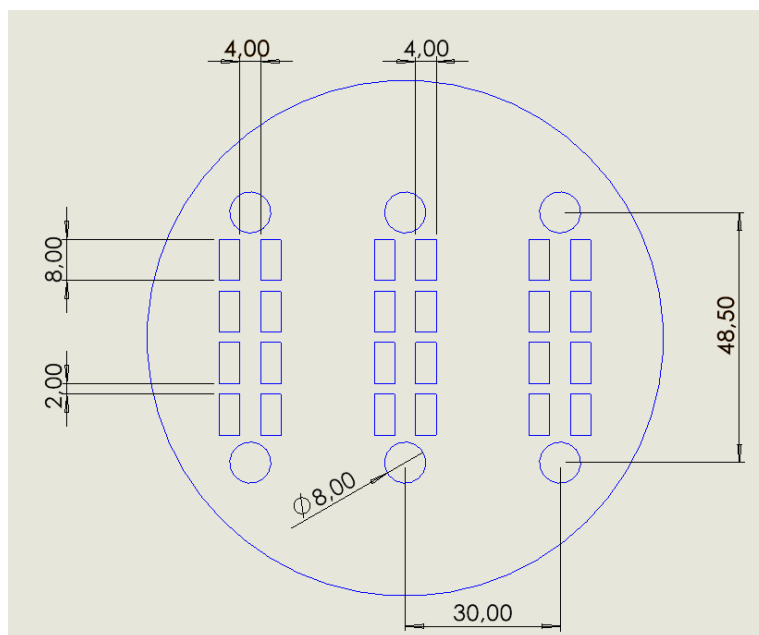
2D drawing of the electrode mask design, made in SolidWorks®, with all the relevant measurements, in millimeters, available.
